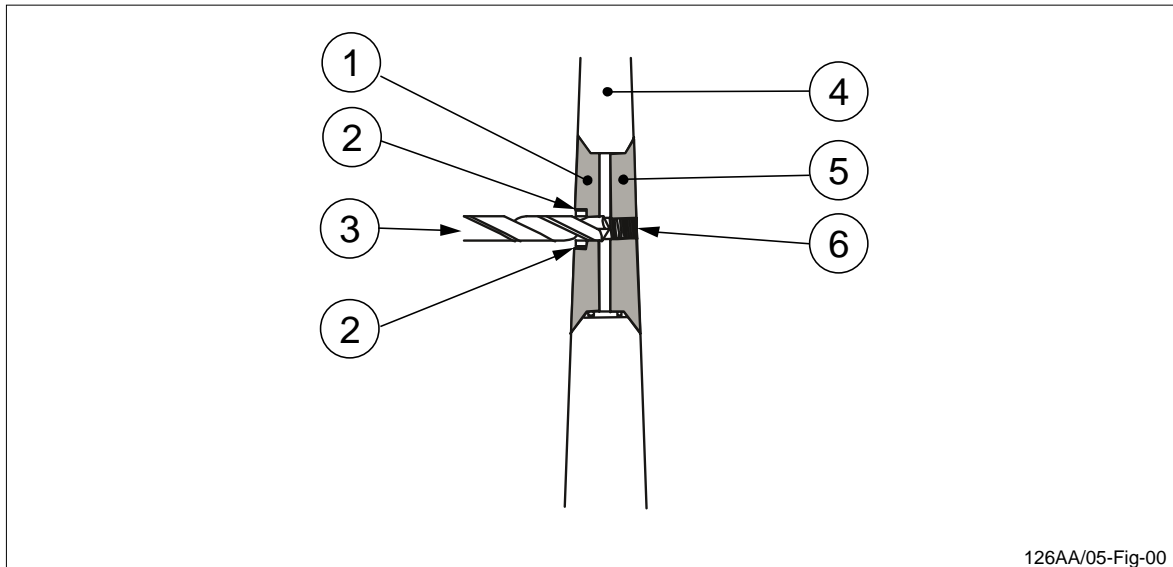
The crack bolt head must be drill out before removing the lifting hole plug.
